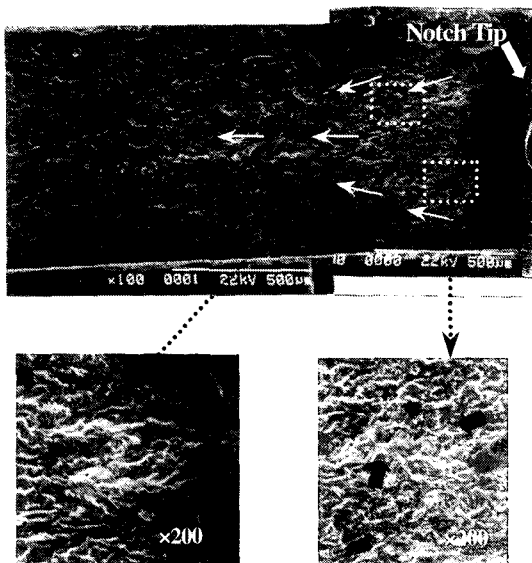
Fatigue fracture surface of unpatched specimen. (a) Fatigue fracture of the specimen. (b)(c) Higher-magnification view of the elongated dimples shown in (a).
